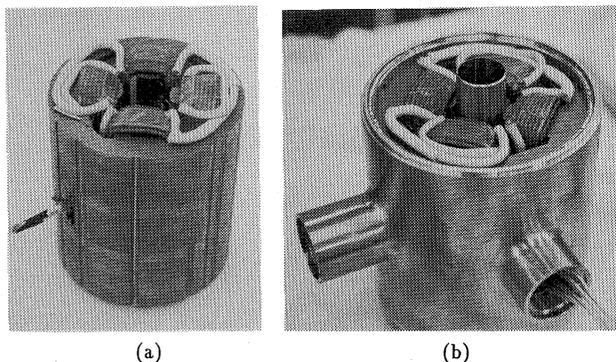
A quadrupole magnet before (a) and after (b) assembling.
